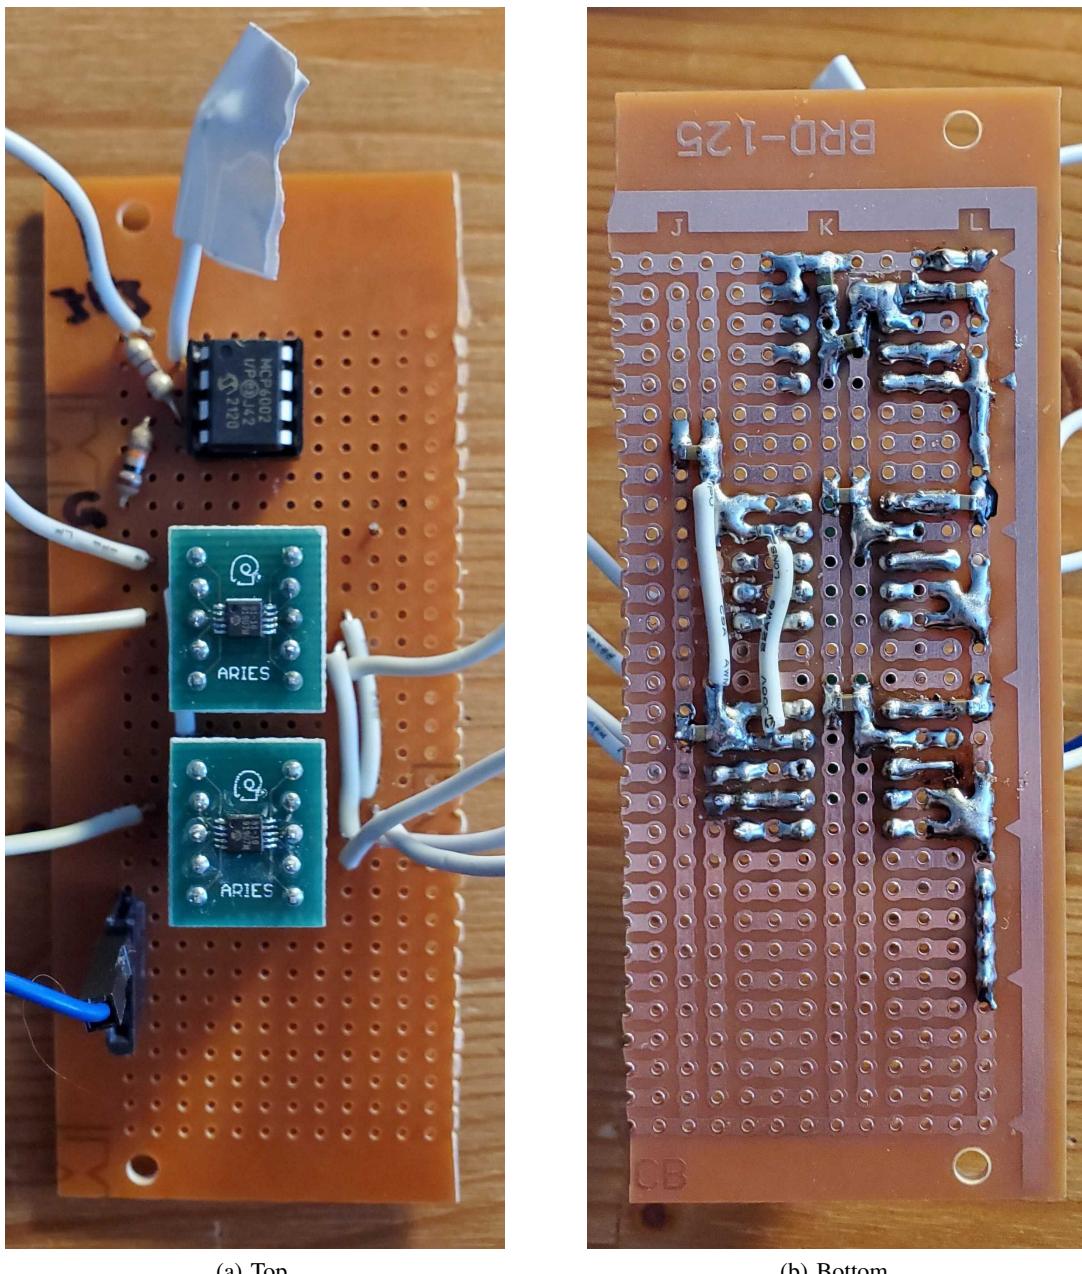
Pictures of the assembled perfboard for experimenting with the MCP33151-10 ADC. Surface-mount decoupling capacitors are soldered on the bottom.
